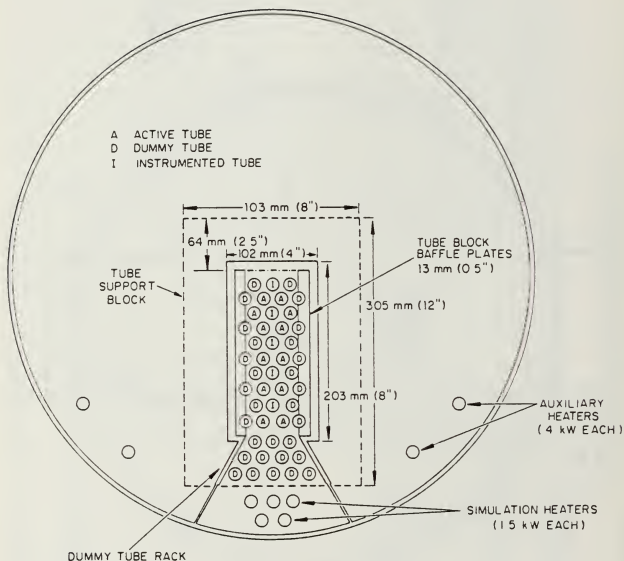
Sectional View of Evaporator Showing Tube Bundle, Dummy Tube Rack and Simulation Heaters
